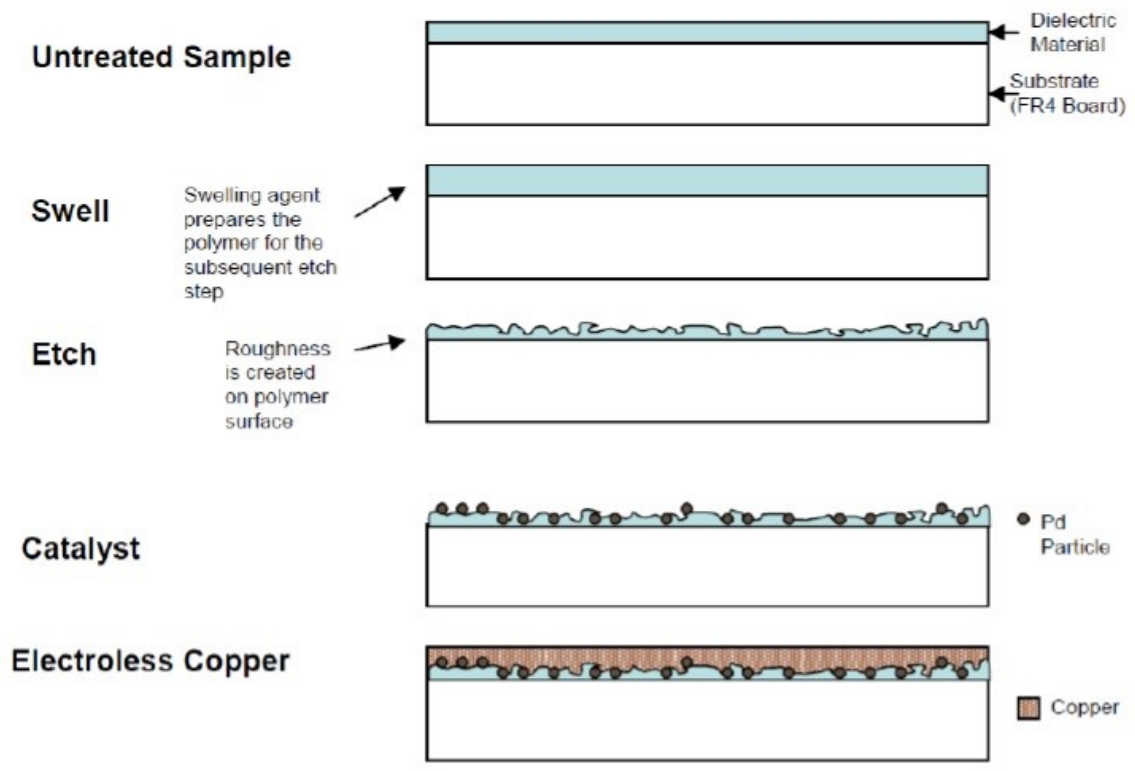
Electroless copper deposition process flow used to metallize 3-D printed prototype with copper.
